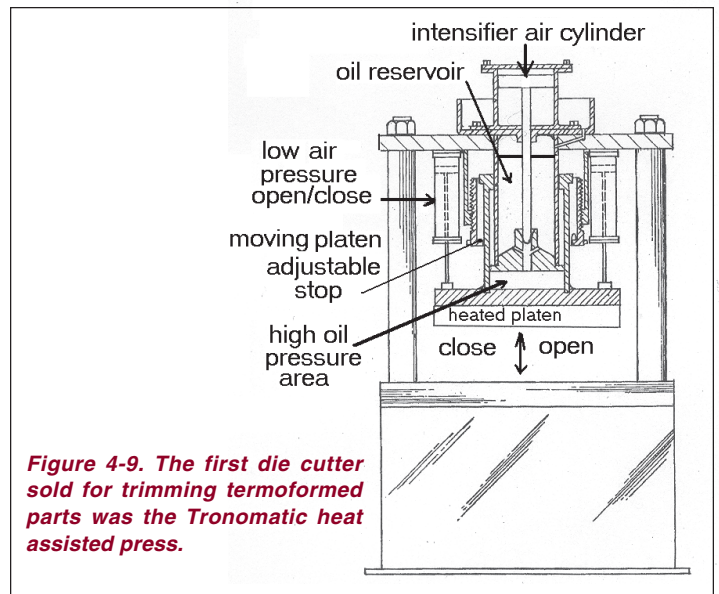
The first die cutter sold for trimming thermoformed parts was the Tronomatic heat assisted press.
